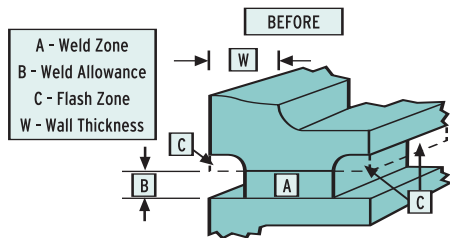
16 Vibration Welded Butt Joint
